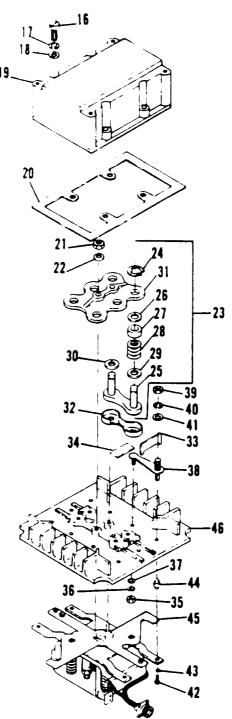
Main Load Contactor (Type A), Exploded View (Sheet 2 of 3)
